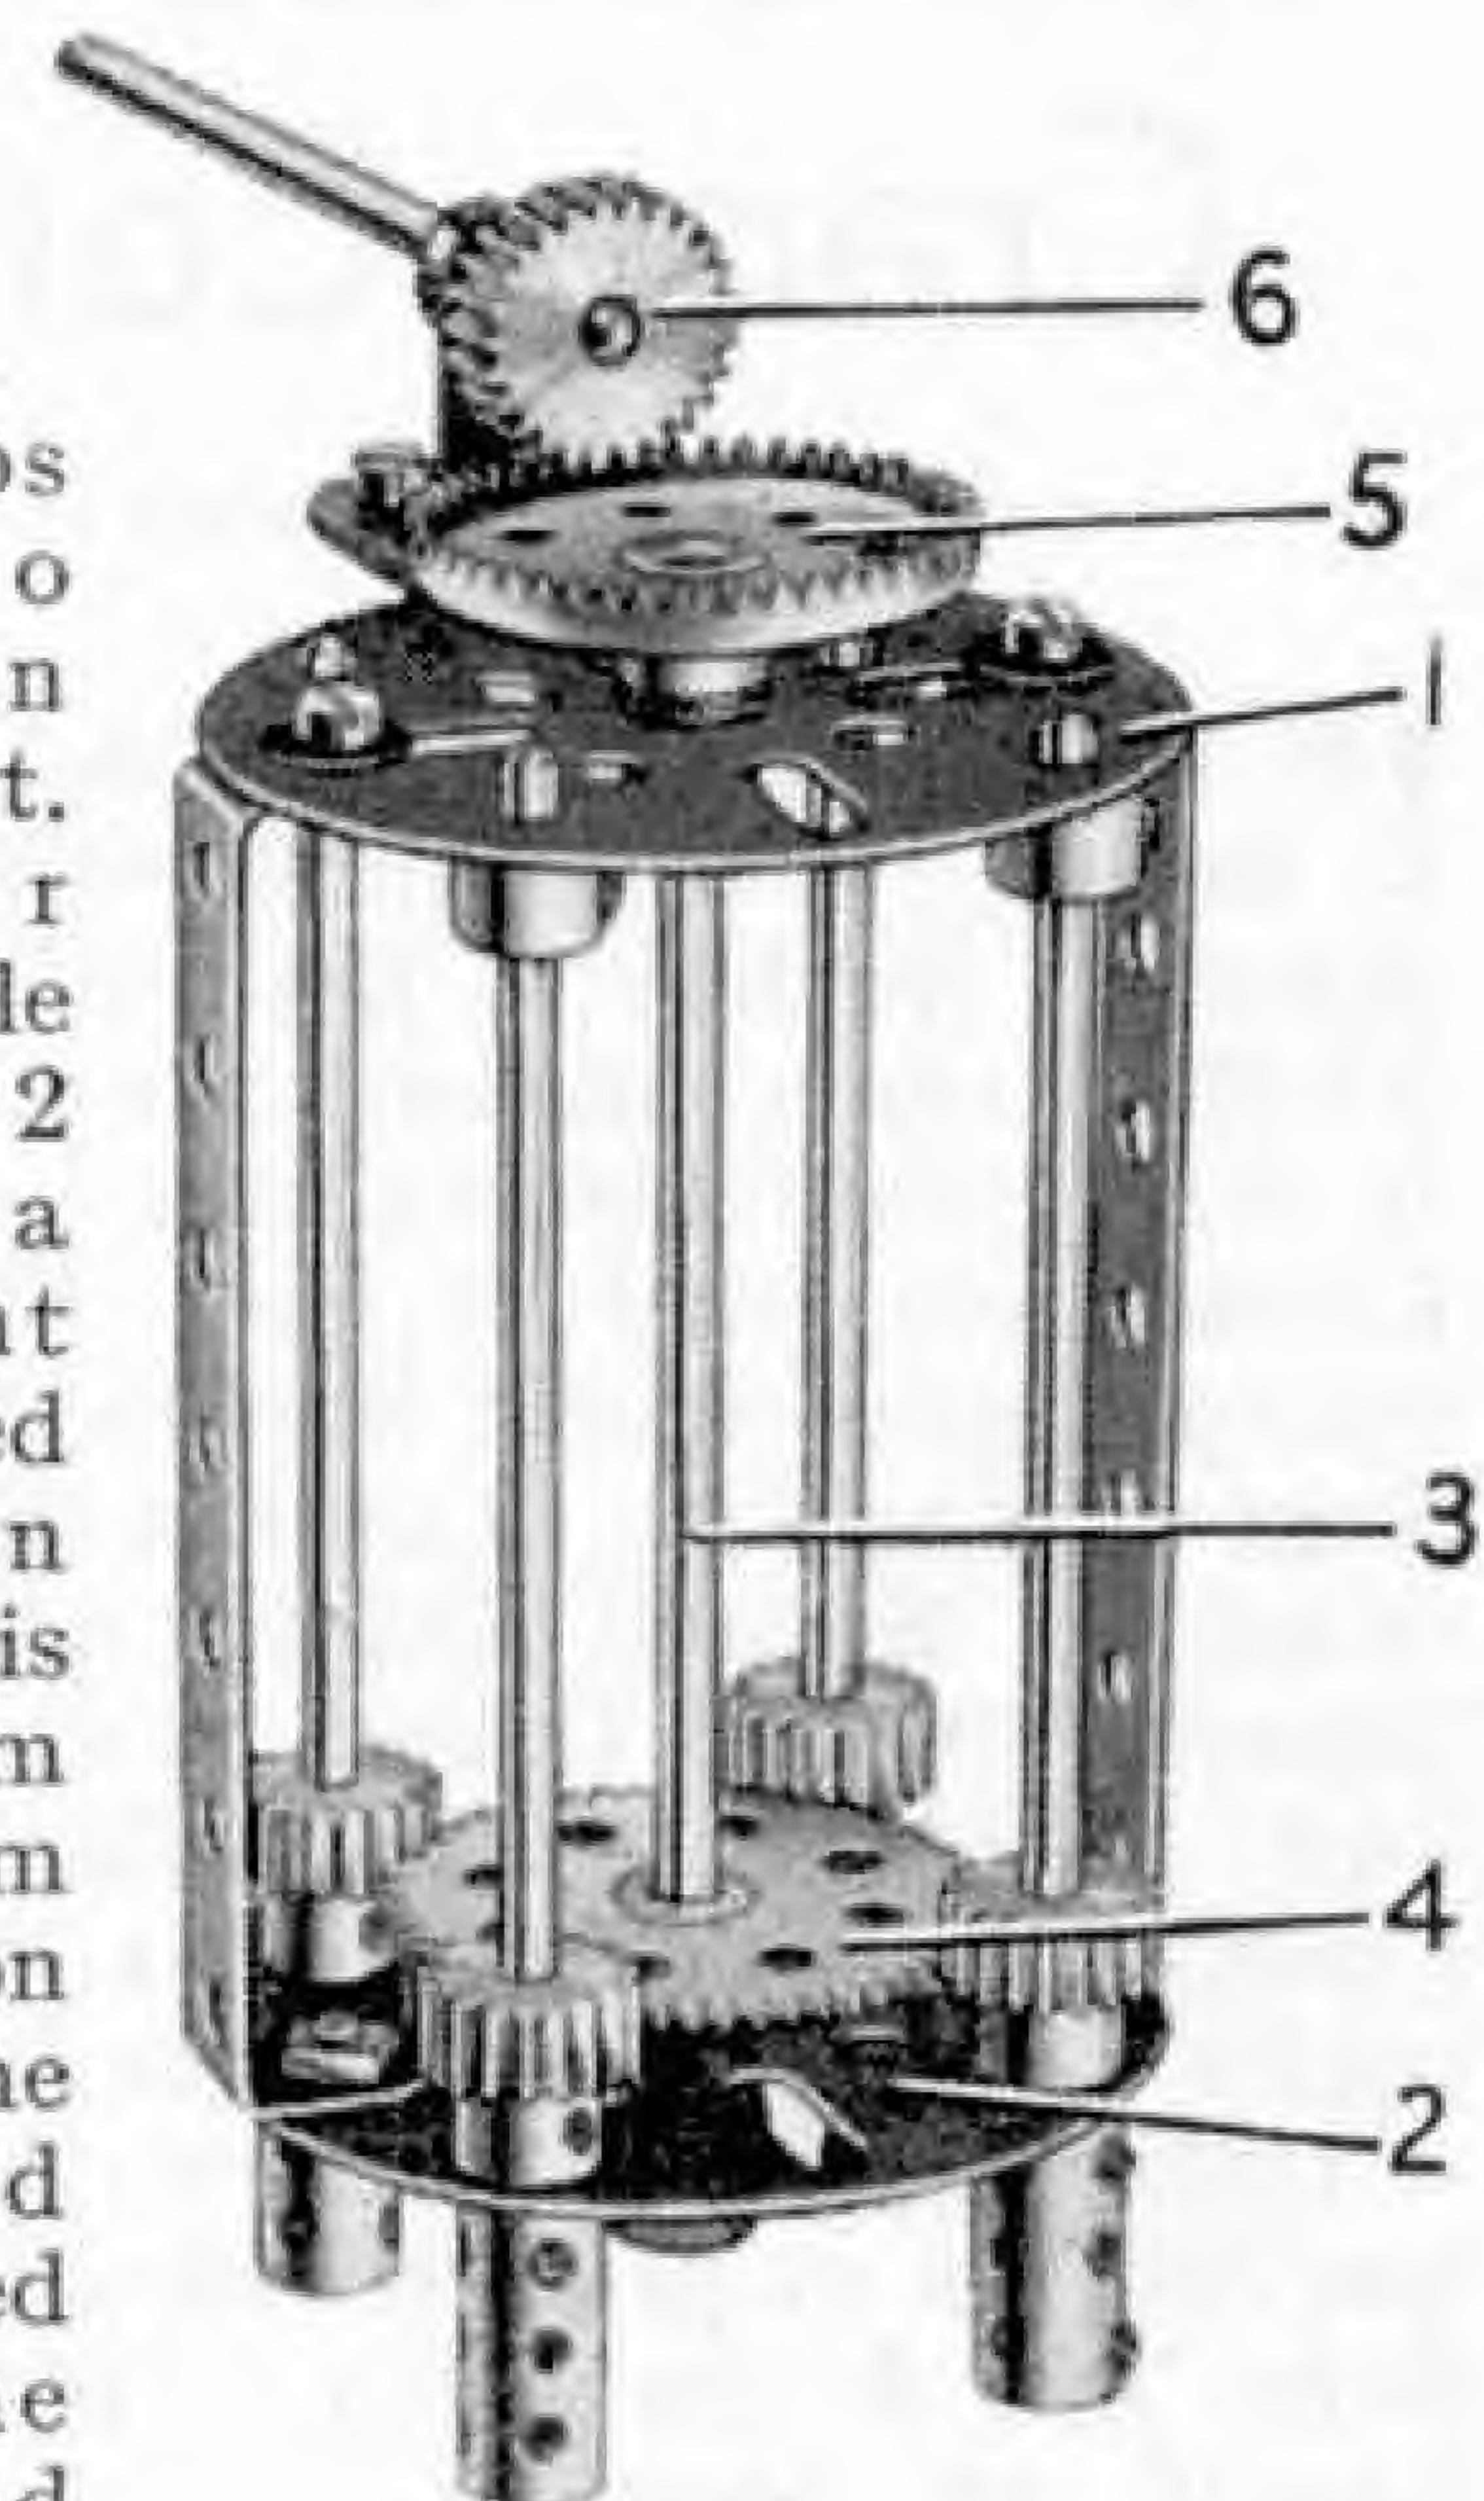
A drive mechanism for a multiple spindle drilling machine.
